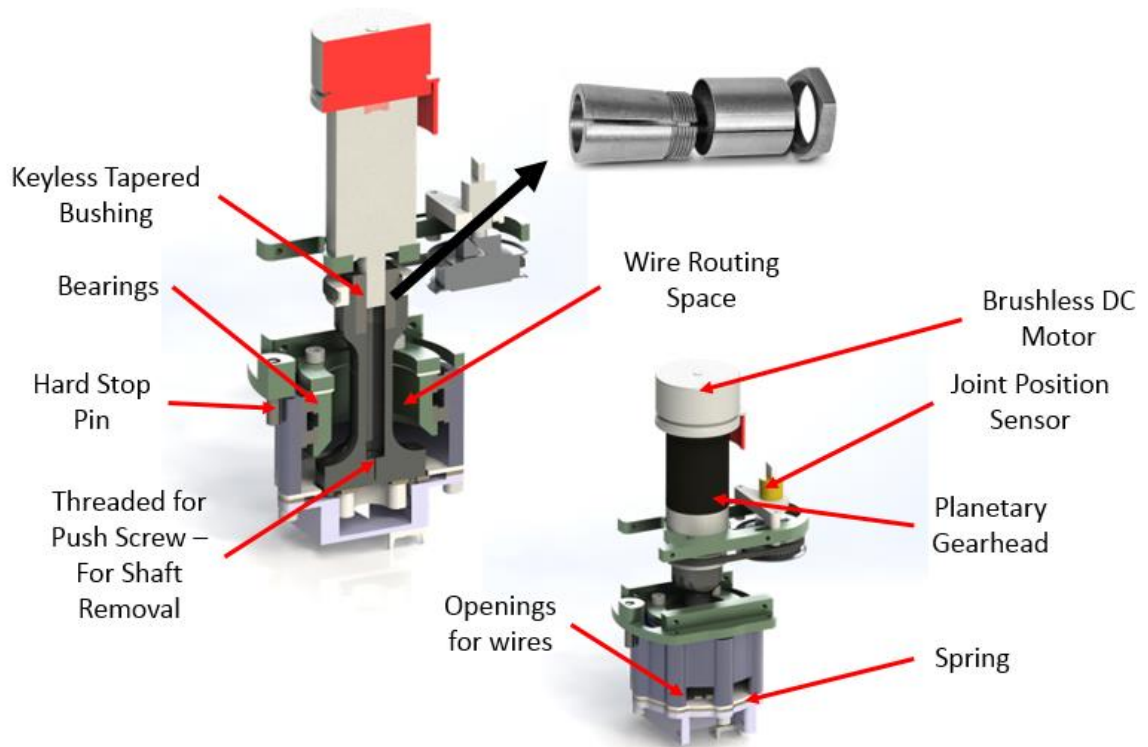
uBot-6 shoulder twist shaft connector clamp
